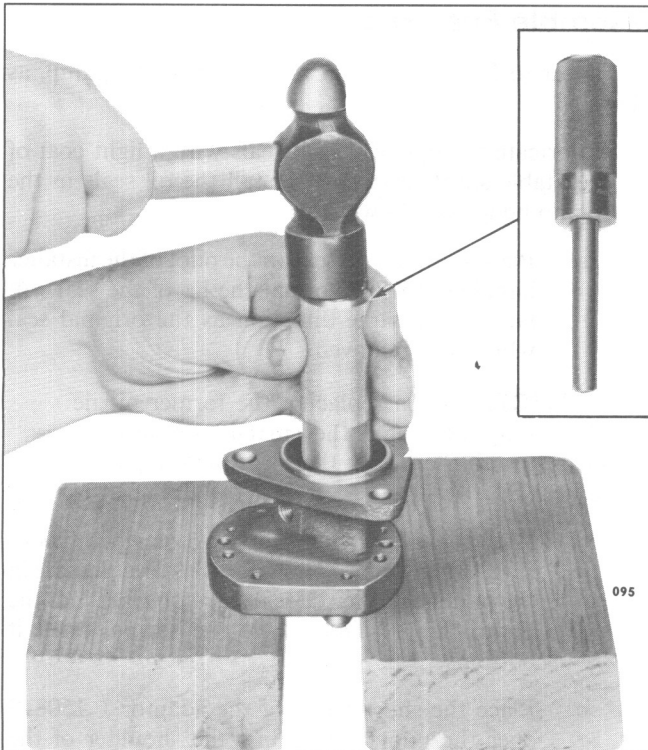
Installing Inner Oil Seal using Tool J 1508-8
